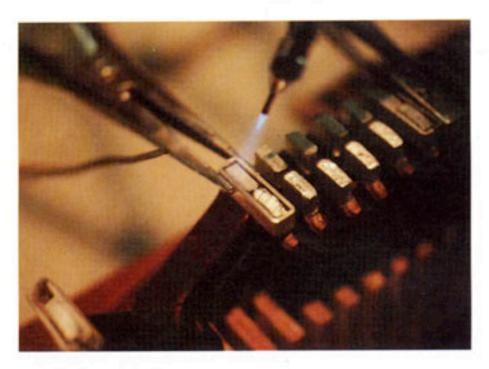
C. The concentrated heat output allows soldering of massive magnet wire profiles without burning nearby insulation parts.
